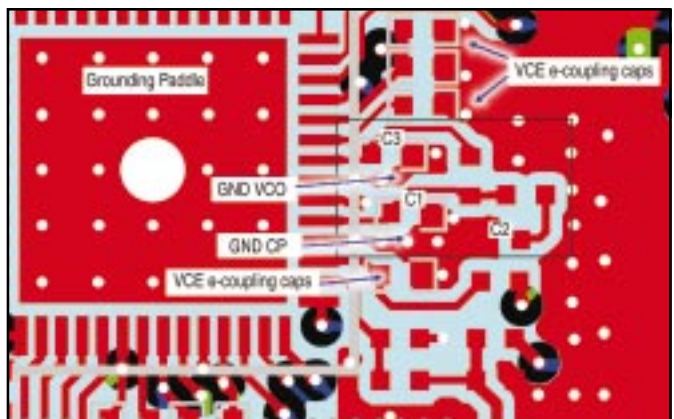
An example of PLL filter component placement and grounding is shown using the MAX2827 reference design board.
